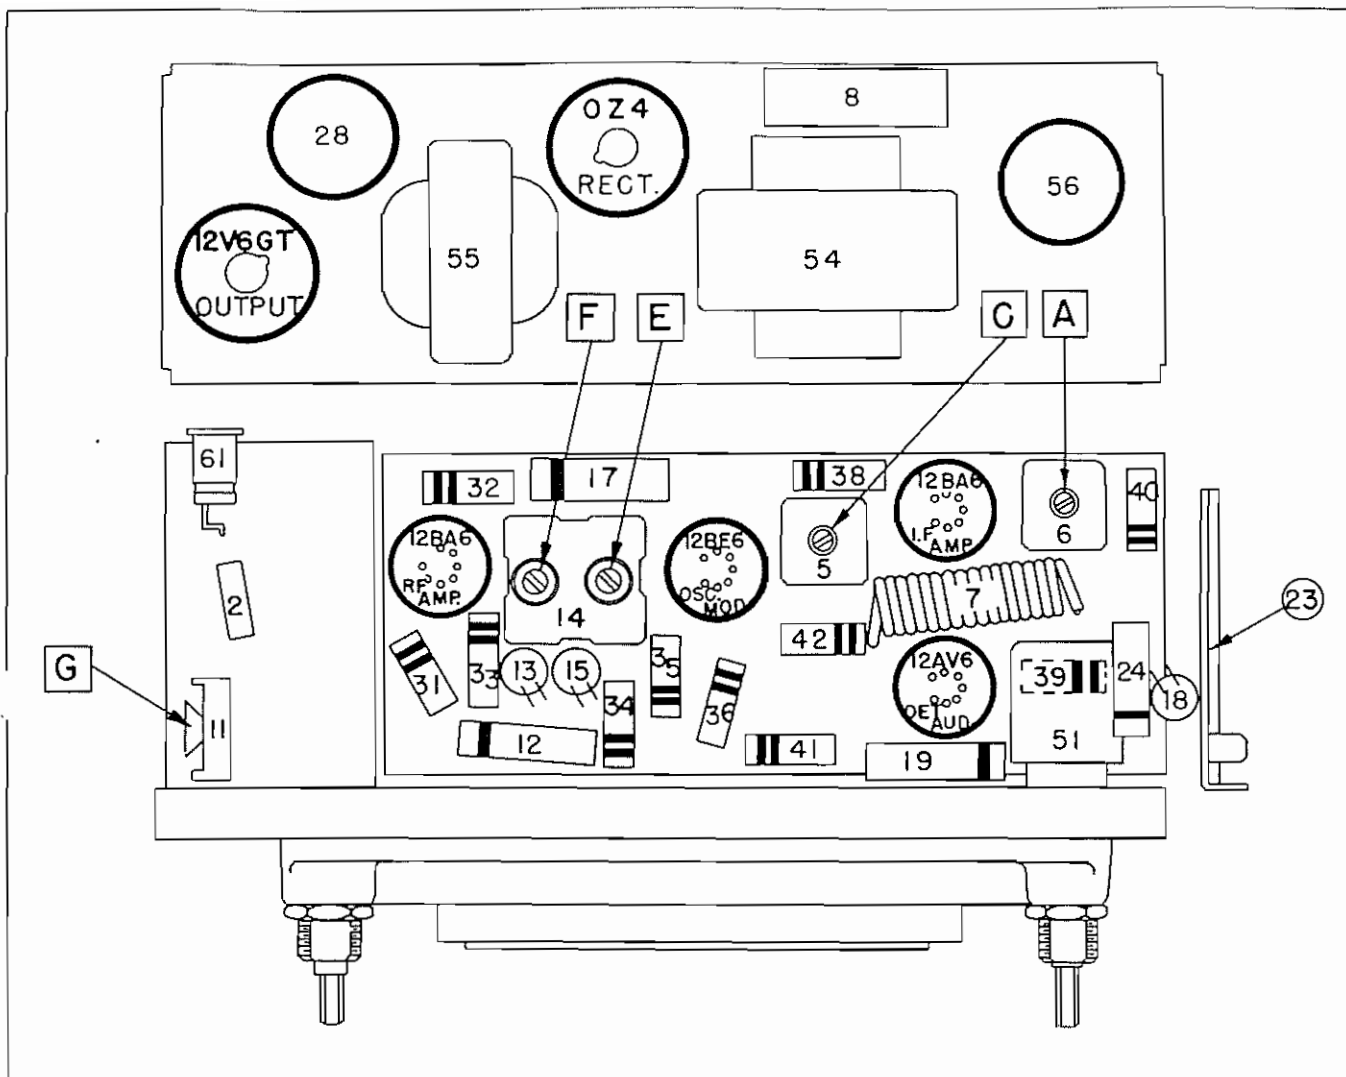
PARTS LAYOUT - TOP VIEW - 987724 - RADIO
